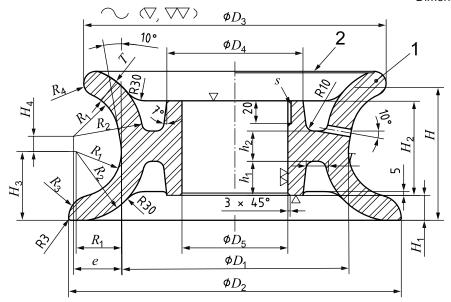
Assembly of steel rollers for nominal sizes 300 and above (type A and type B)
